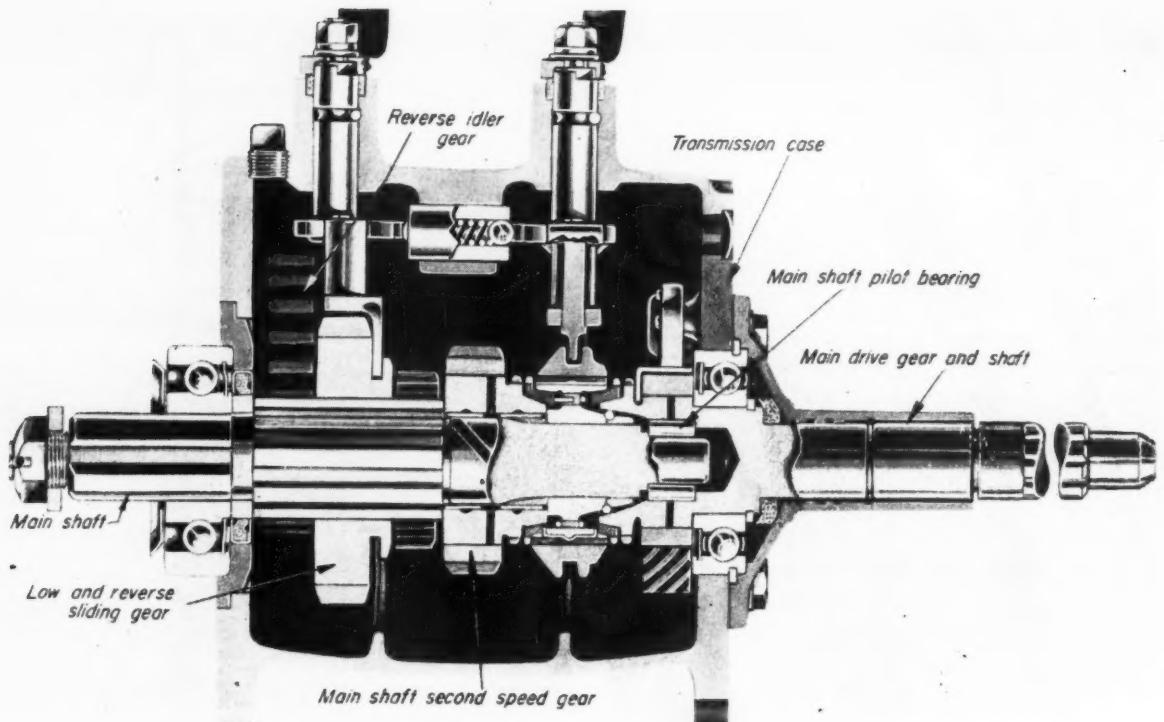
Jeep transmission contains forged carburized alloy-steel reverse idler gear, main drive gear and shaft, mainshaft, low-and-reverse sliding gear, and mainshaft second-speed gear. Case is gray cast iron
